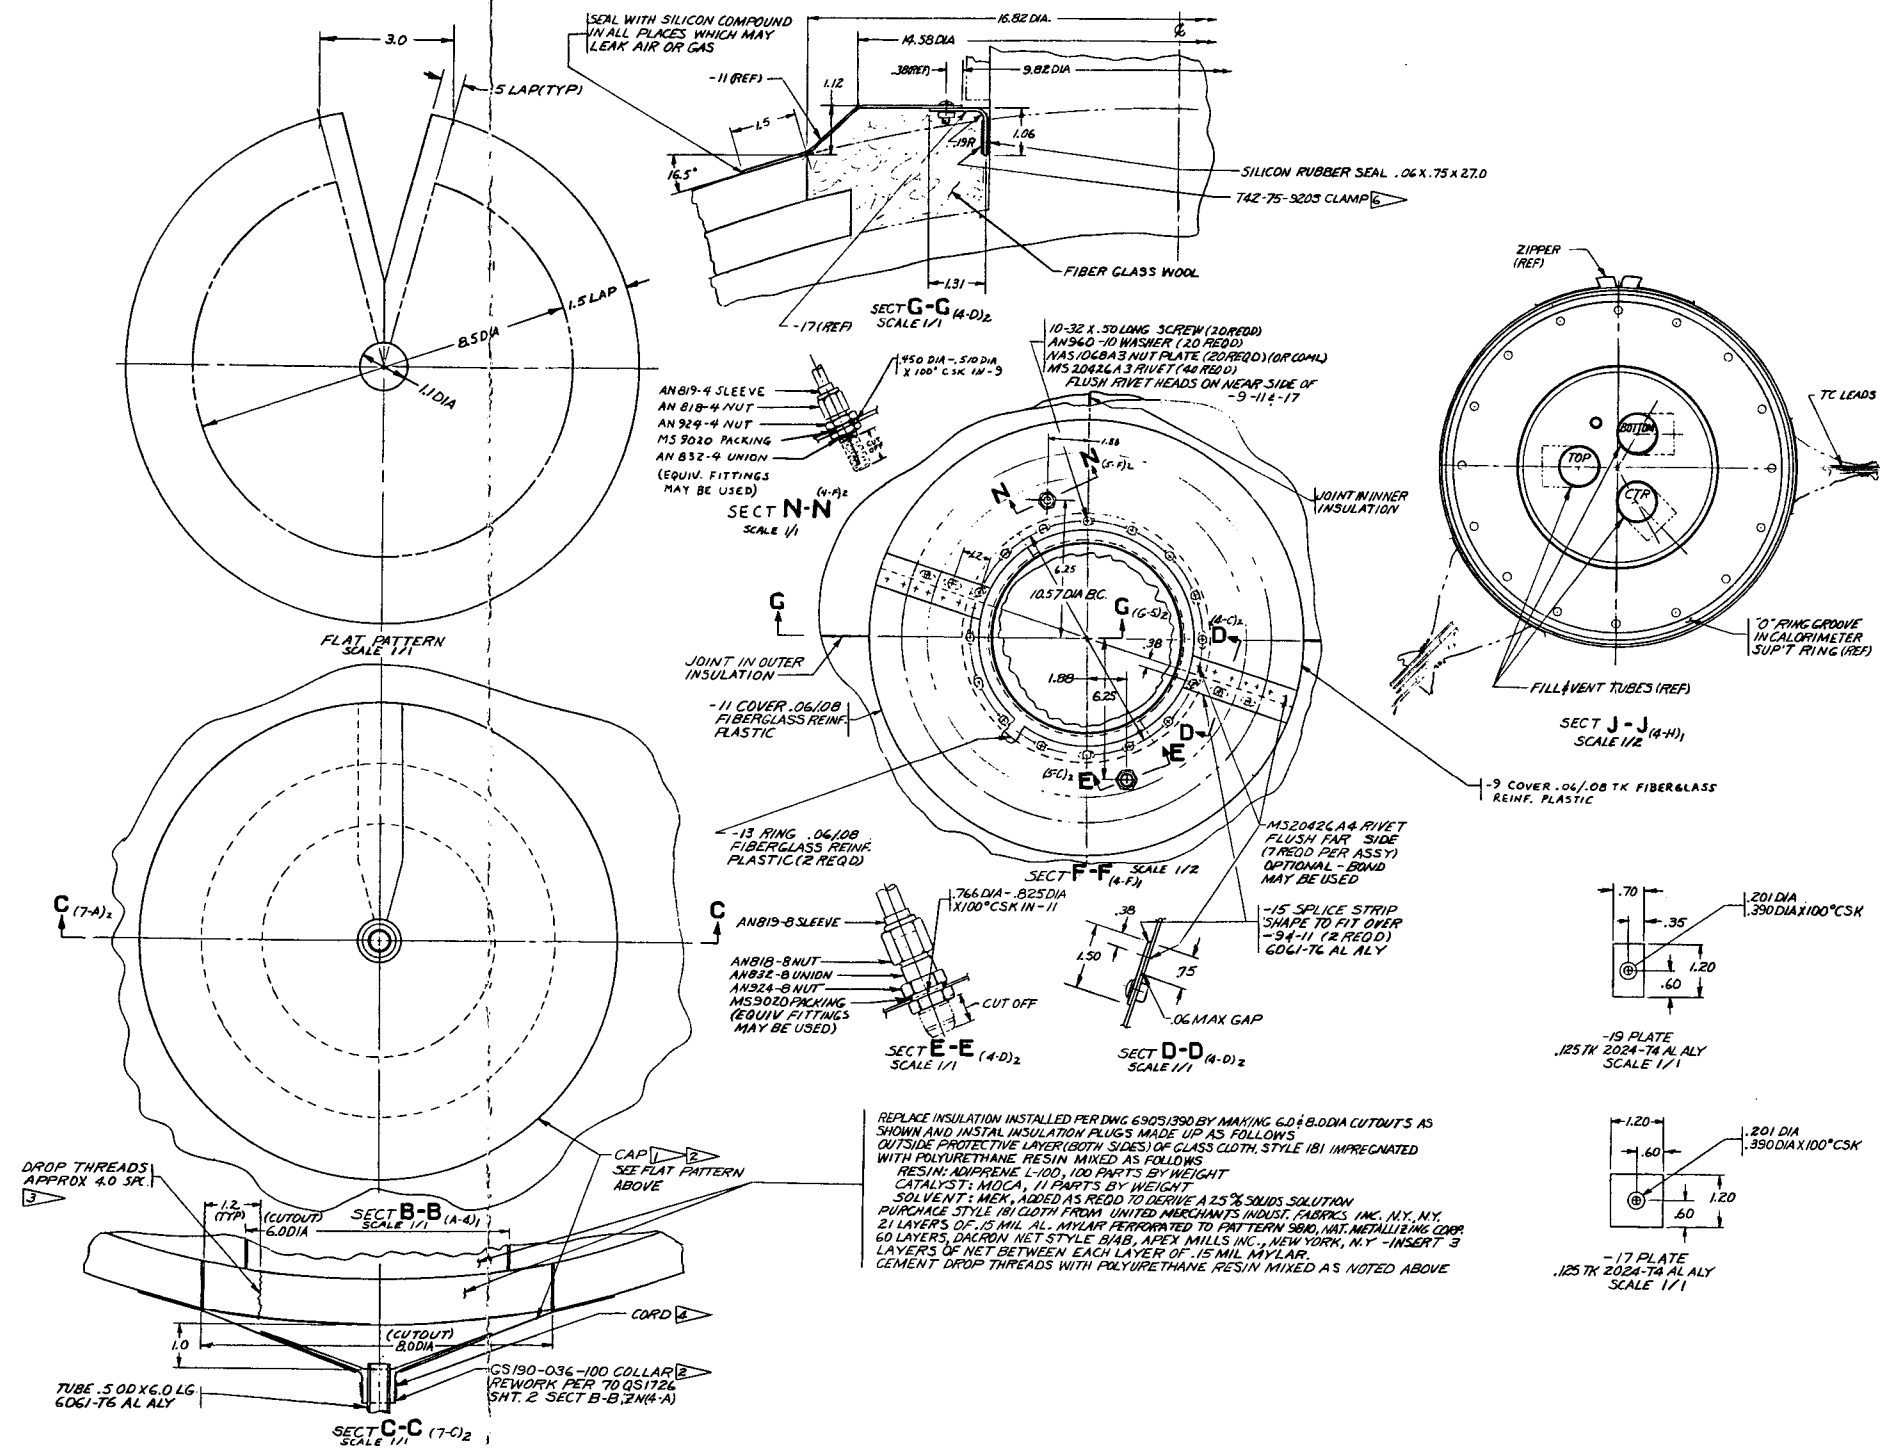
Purge jacket installation on the cylindrical calorimeter, GAC-9 insulation. (Sheet 2 of 2)
